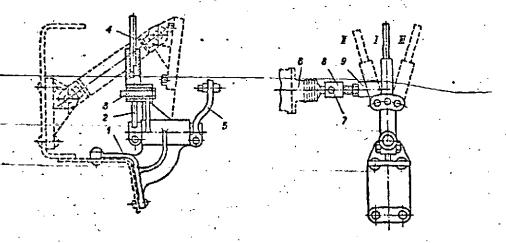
, TRANSFER GEARSHIFT MANUAL (REPEATING) CONTROL LINK AGE
